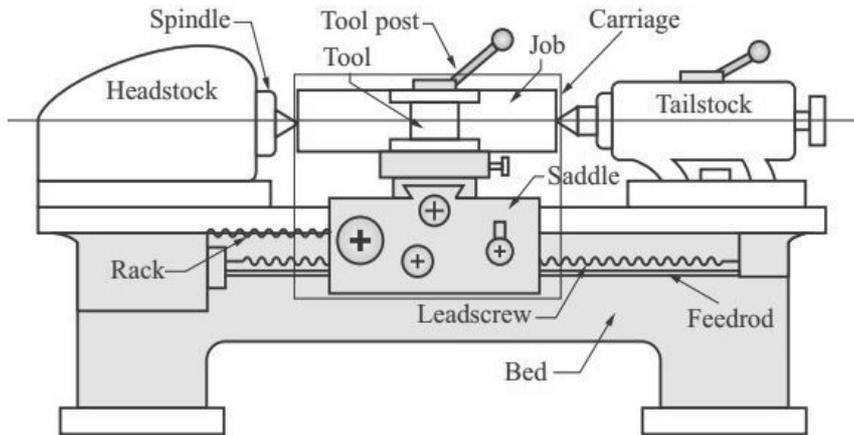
Lathe Machine (source: rgpvonline.com)
